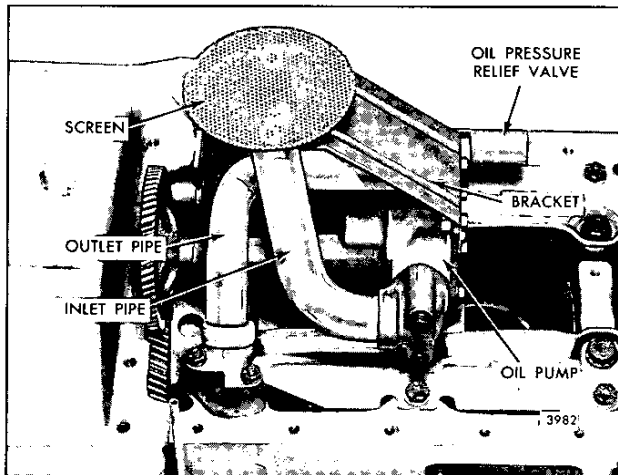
Lubricating Oil Pump Mounting (8V Engine)
